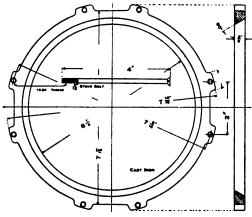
RING FOR CLAMPING STATOR SHERTS
